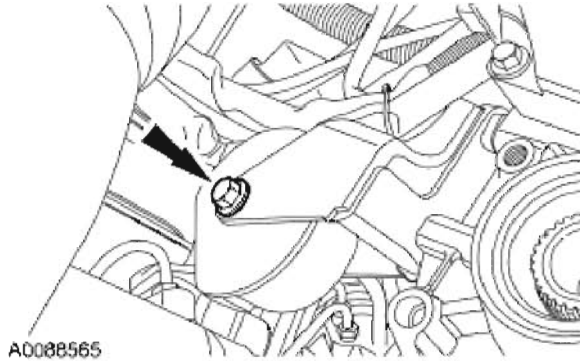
Securing Engine To Lift Table Using Special Tool (014-0001, 014-00765)
